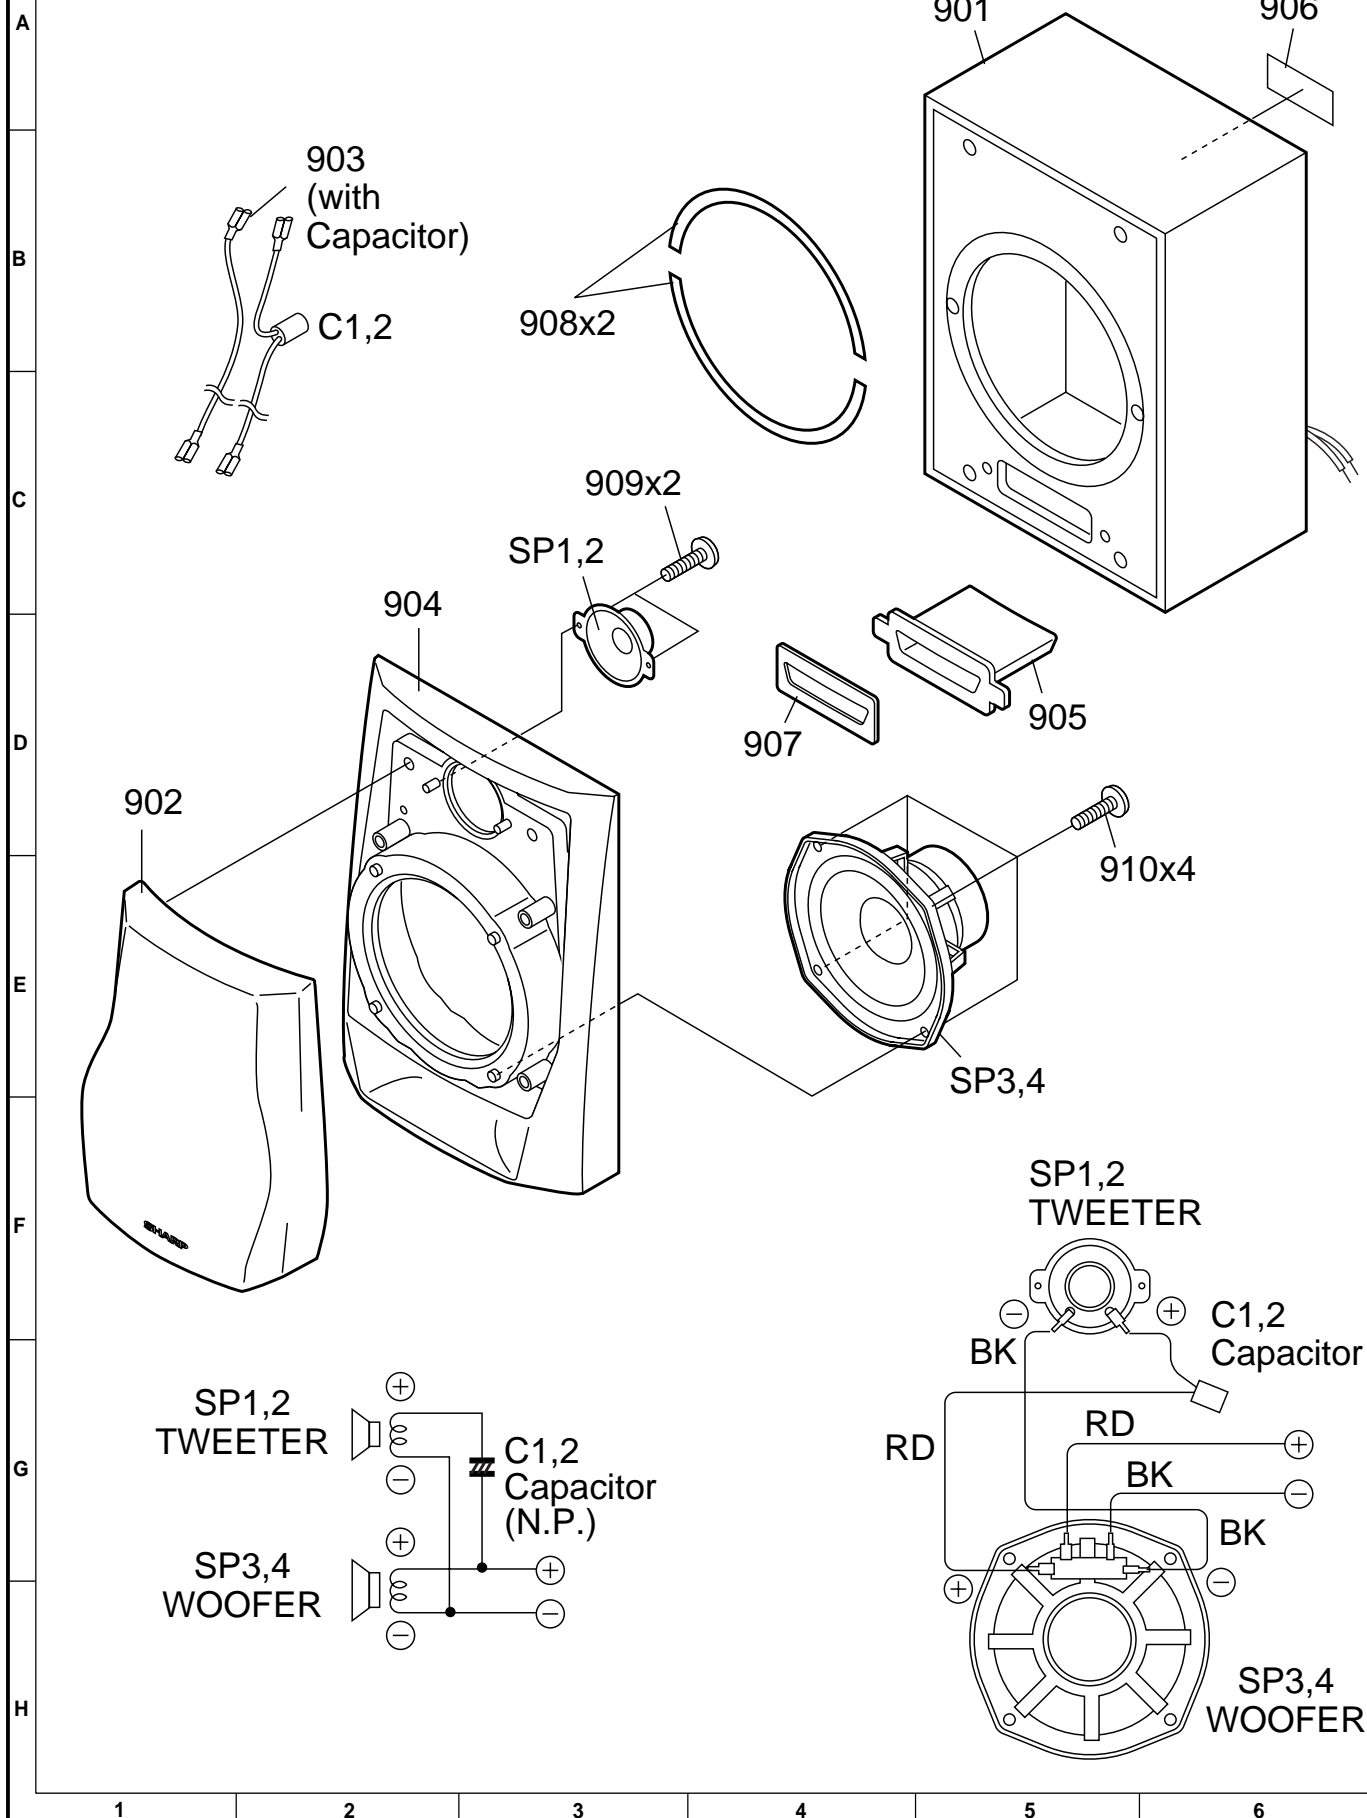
SPEAKER EXPLODED VIEW (1/2)
